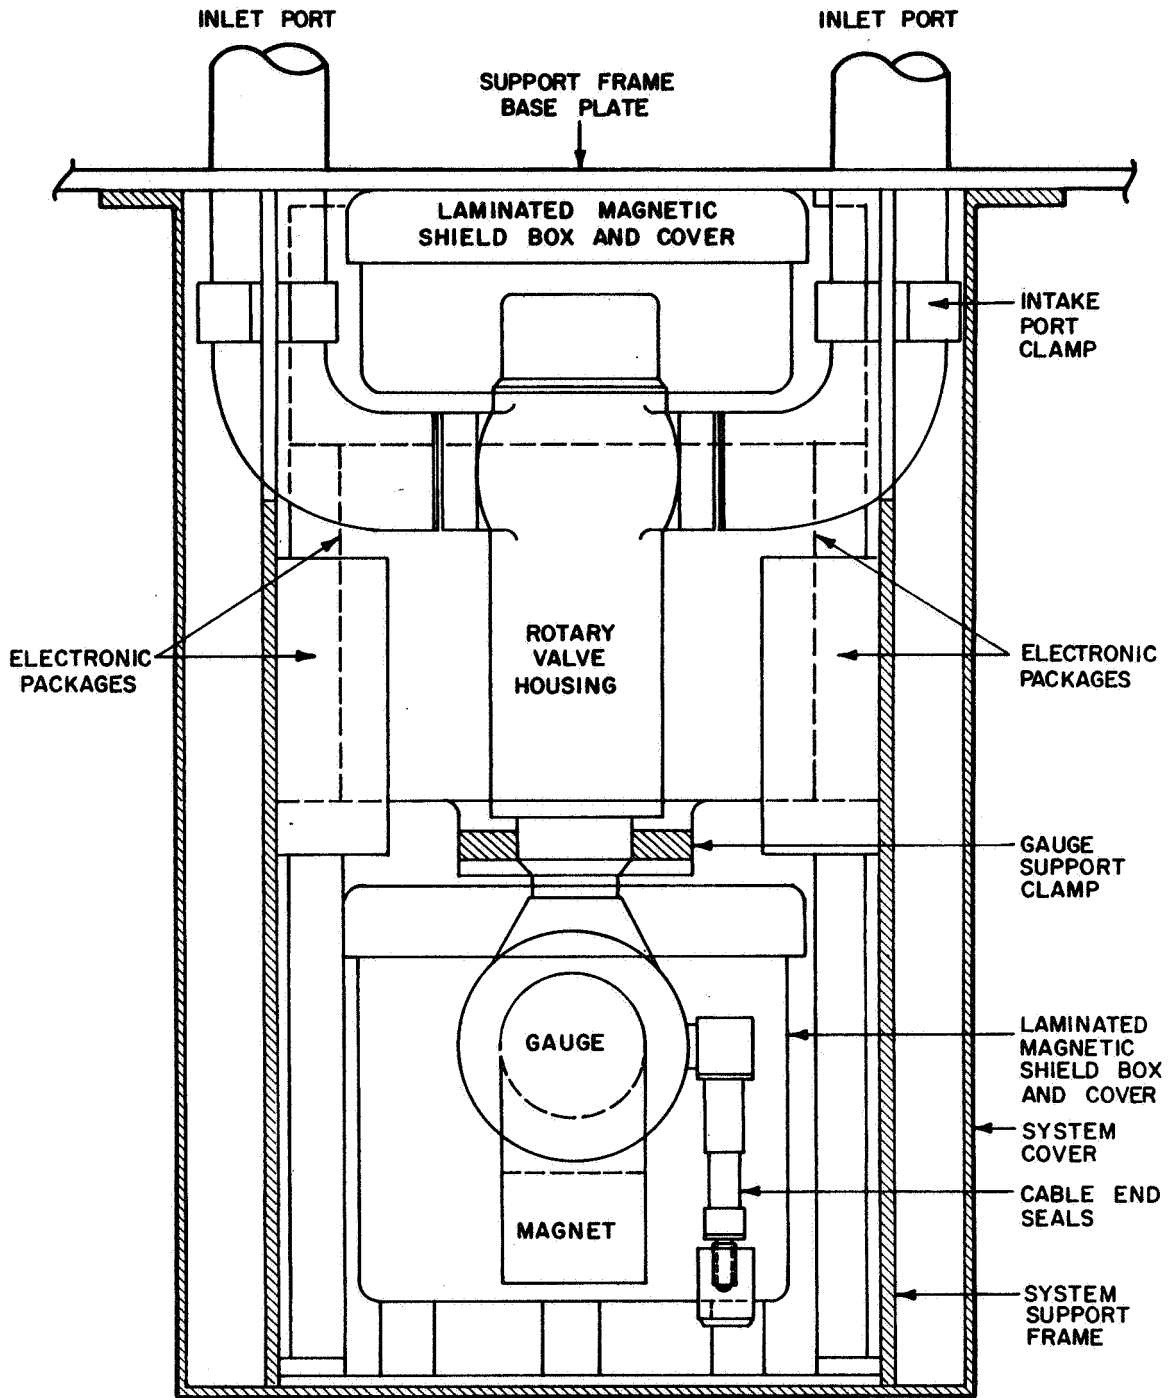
Front view of rotary valve and flexure-pivot valve version of yaw attitude sensor package.
